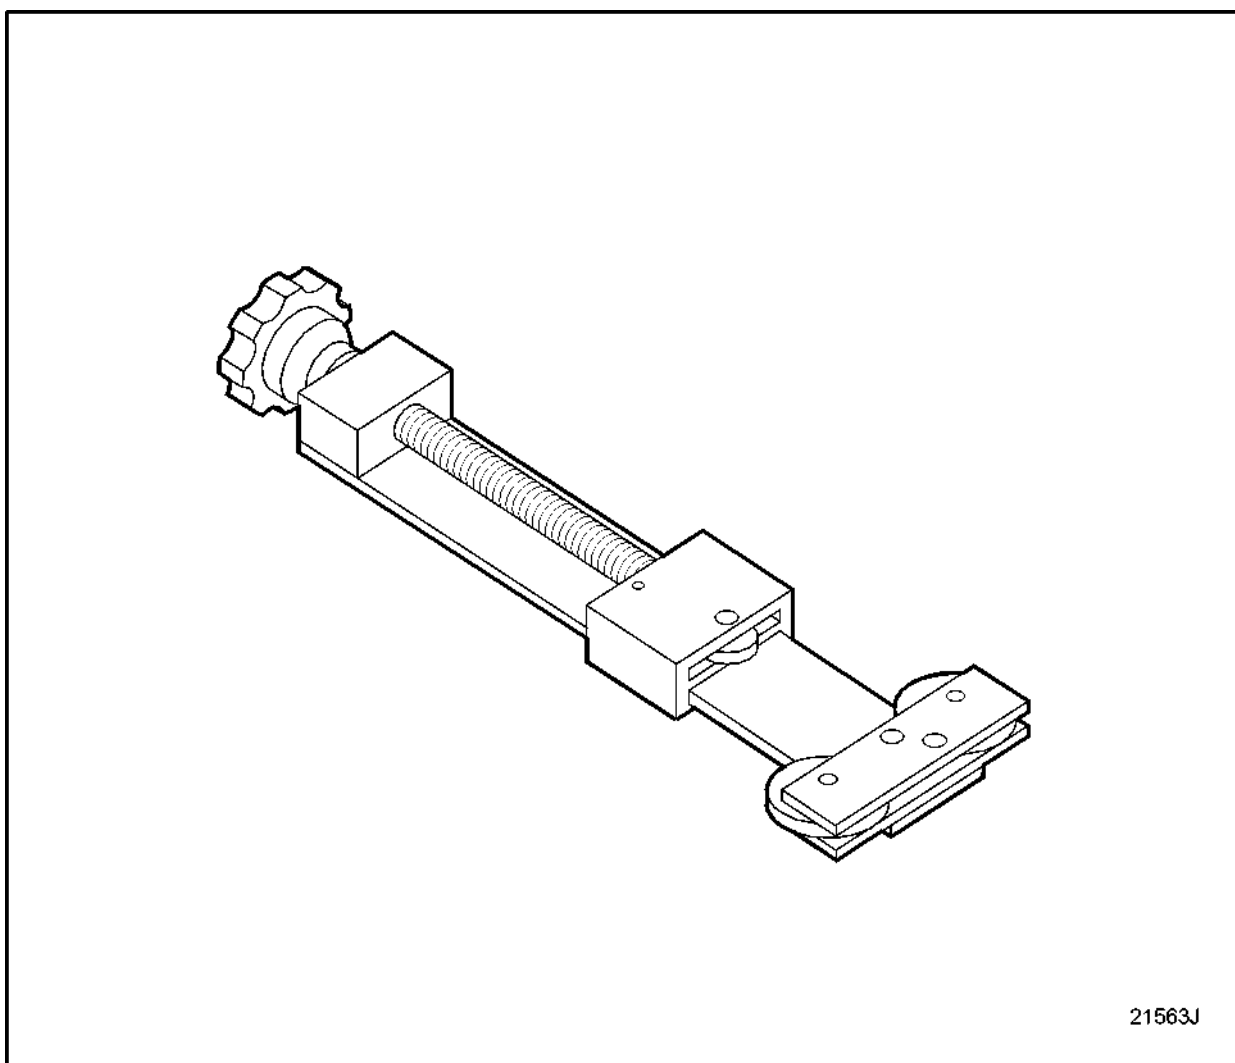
Filter Cutter (Fuel and Lube),J 29925
